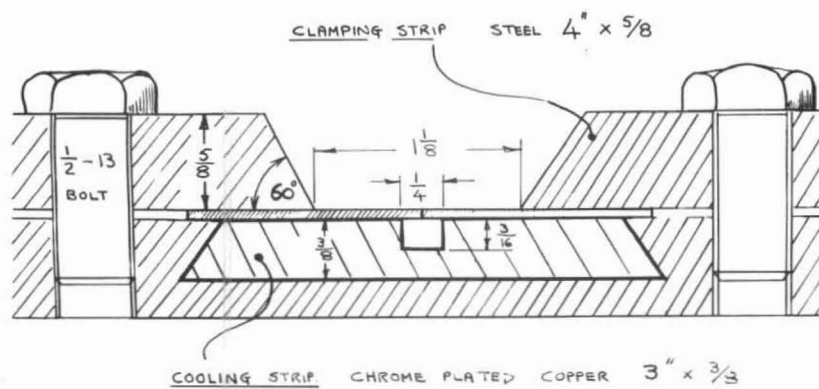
Cross section of chrome plated copper back-up plate and clamping device with sample in position for welding.
